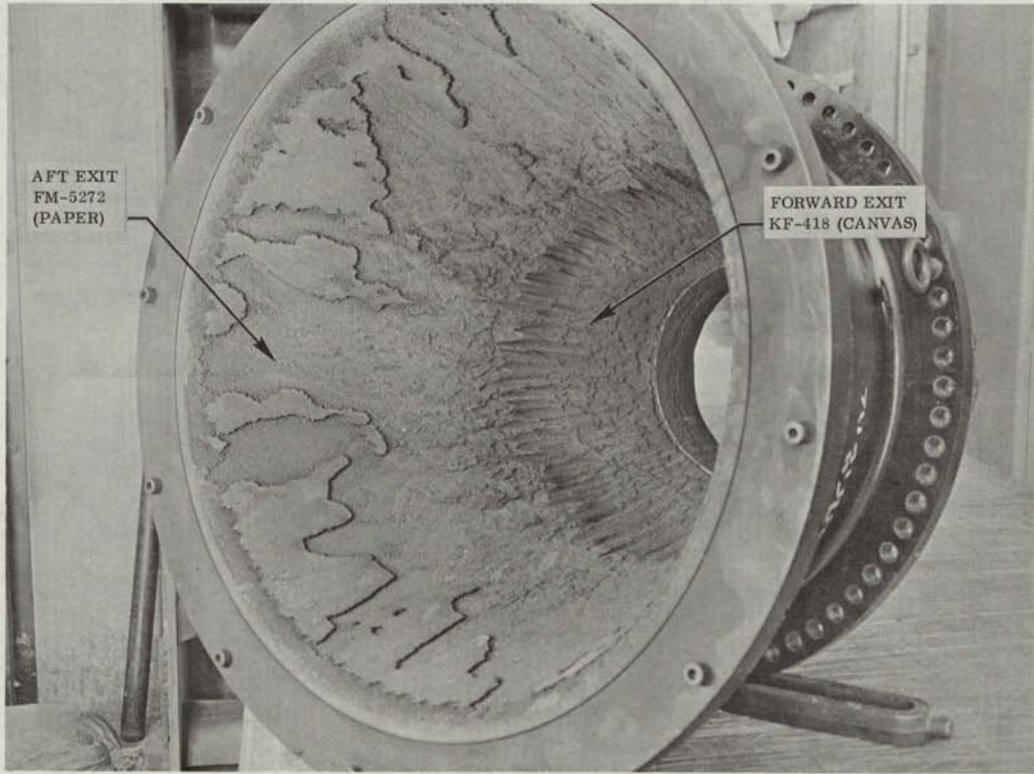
Sectioned Nozzle No. 6 Submerged and Exit Cone Liners
